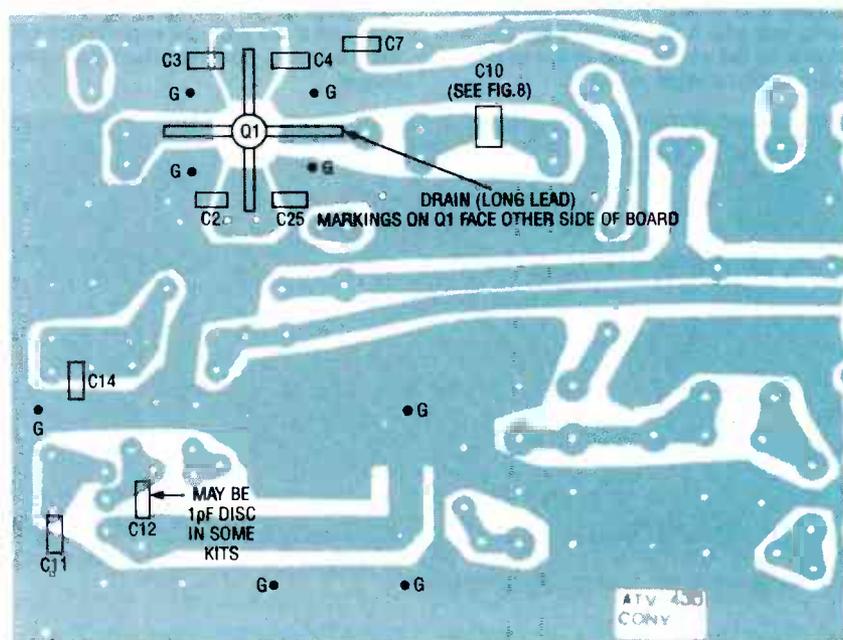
ALL CHIP CAPACITORS, C10 (see Fig. 8), and Q1 mount on the solder side of the board. The markings on Q1 face the component side of the board.
